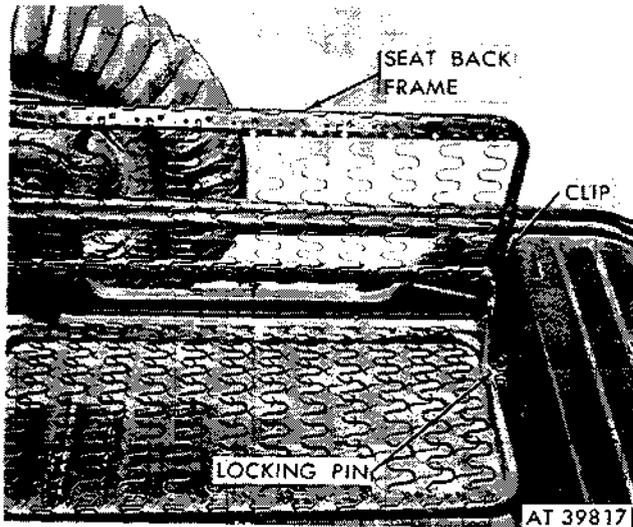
Rear seat frame assembly (M151, M151A1 and M151A2).
